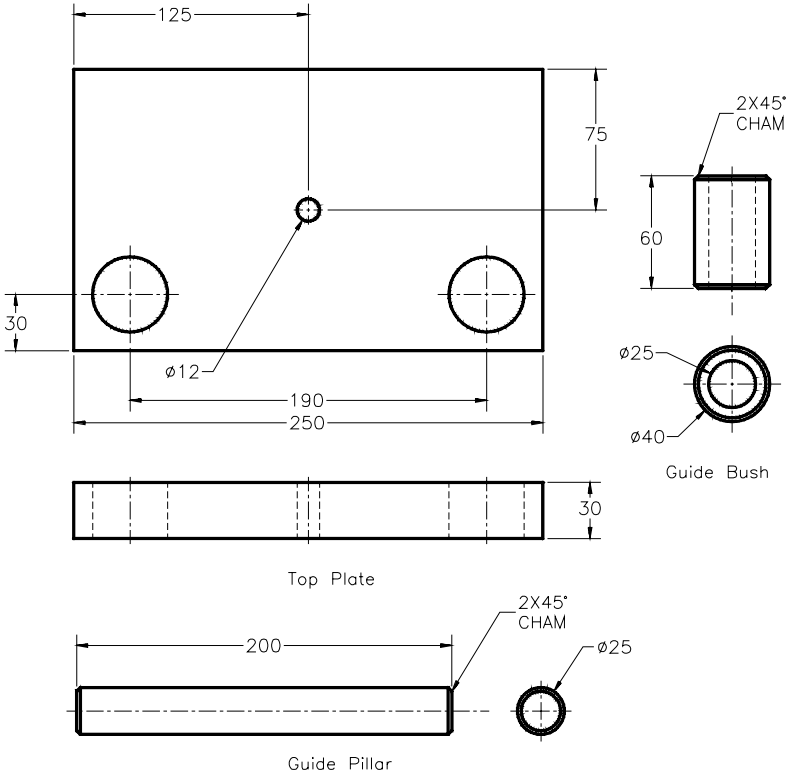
Views and dimensions of the Top Plate, Guide Pillar, and Guide Bush
